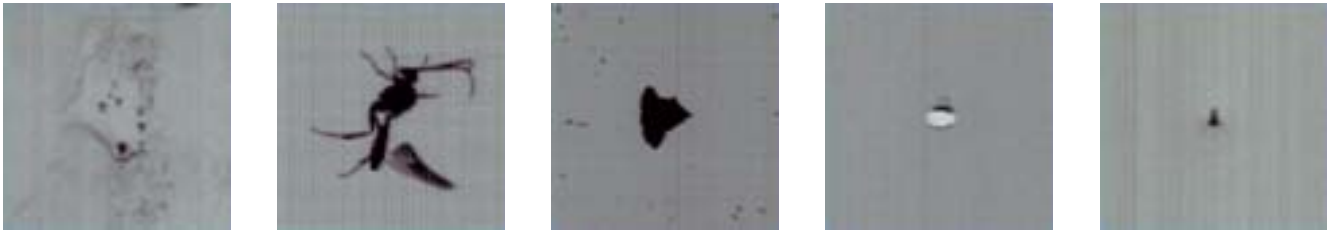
Different types of surface defects: recess, insect, contaminant, hole, gel
